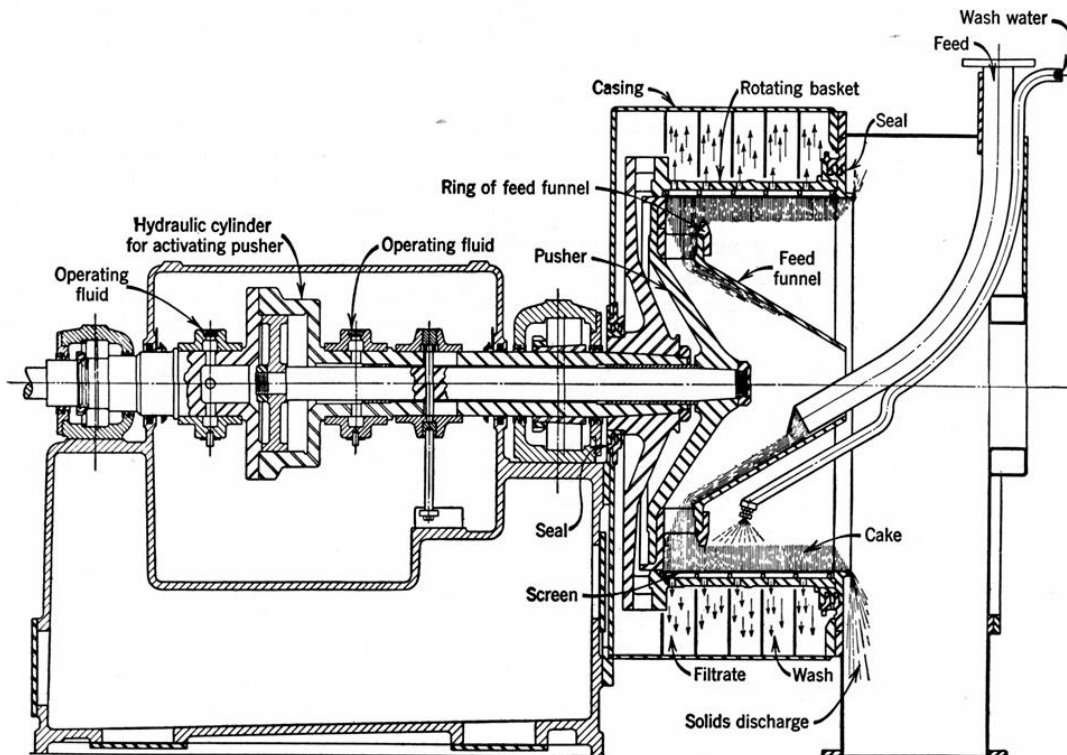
Sectional drawing of a continuous perforate-basket centrifugal with pusher discharge. (Baker Perkins, Inc.)
